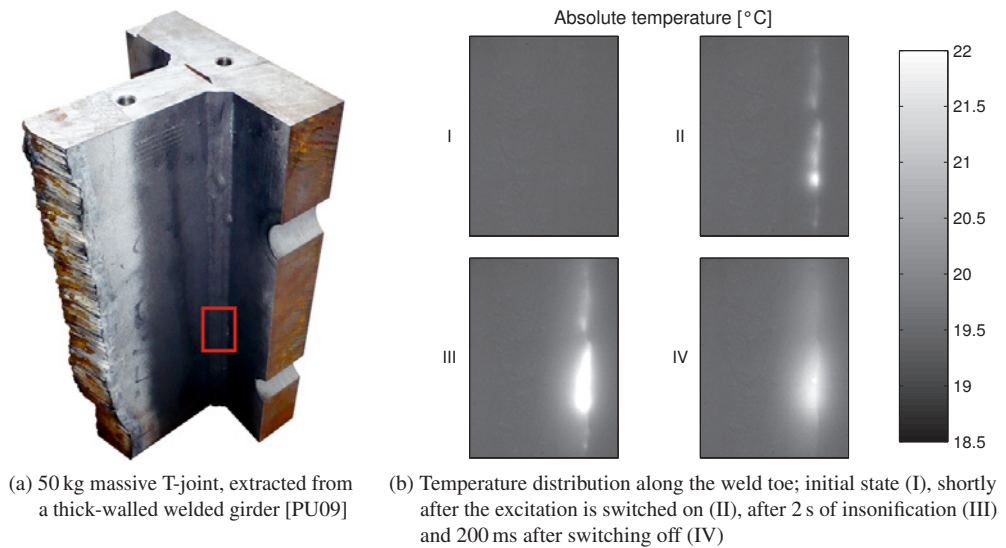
Thermographically detected crack in a massive welded T-joint.
